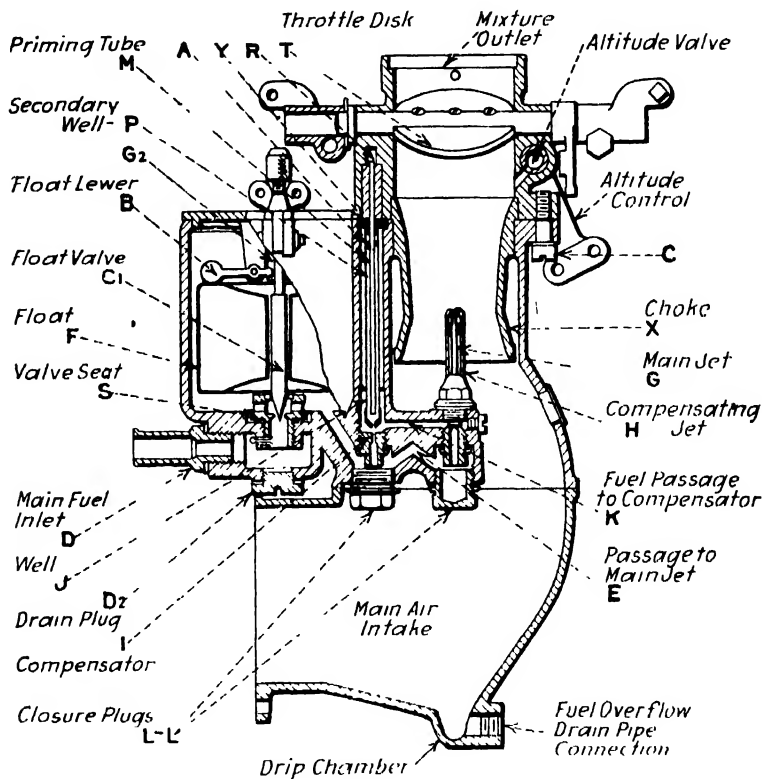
Section of Zenith Duplex Carburetor Used with Liberty Engines.
